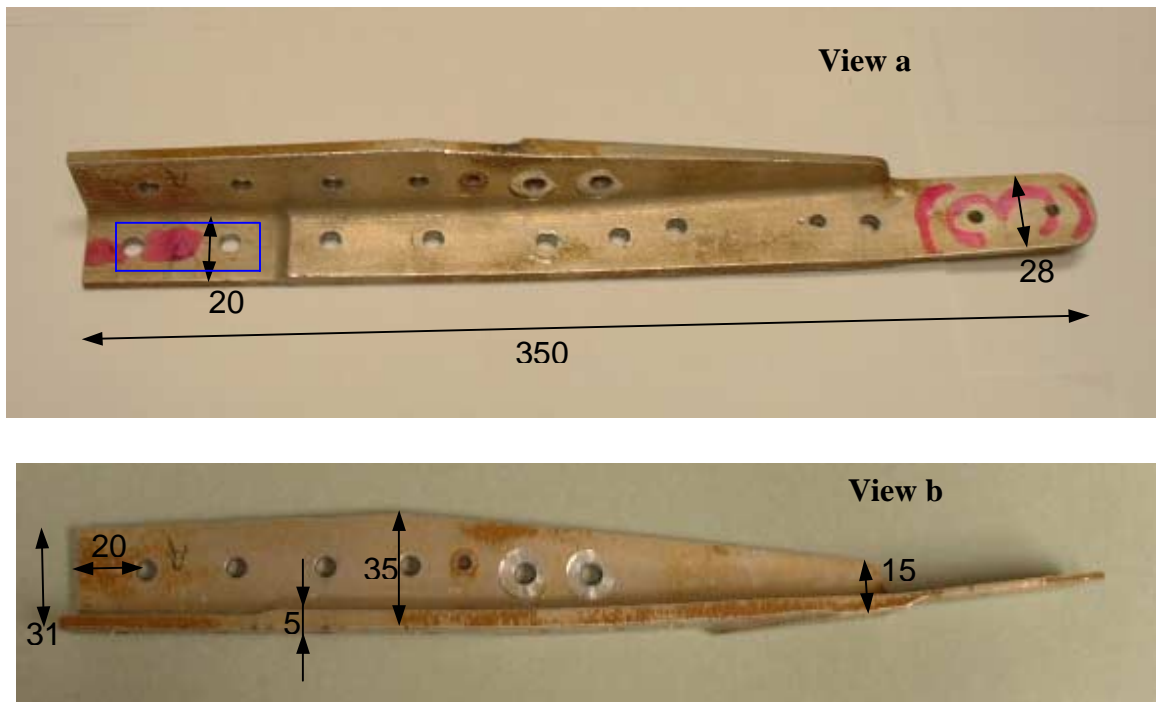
Sample # 3. Crack at fastener hole:
